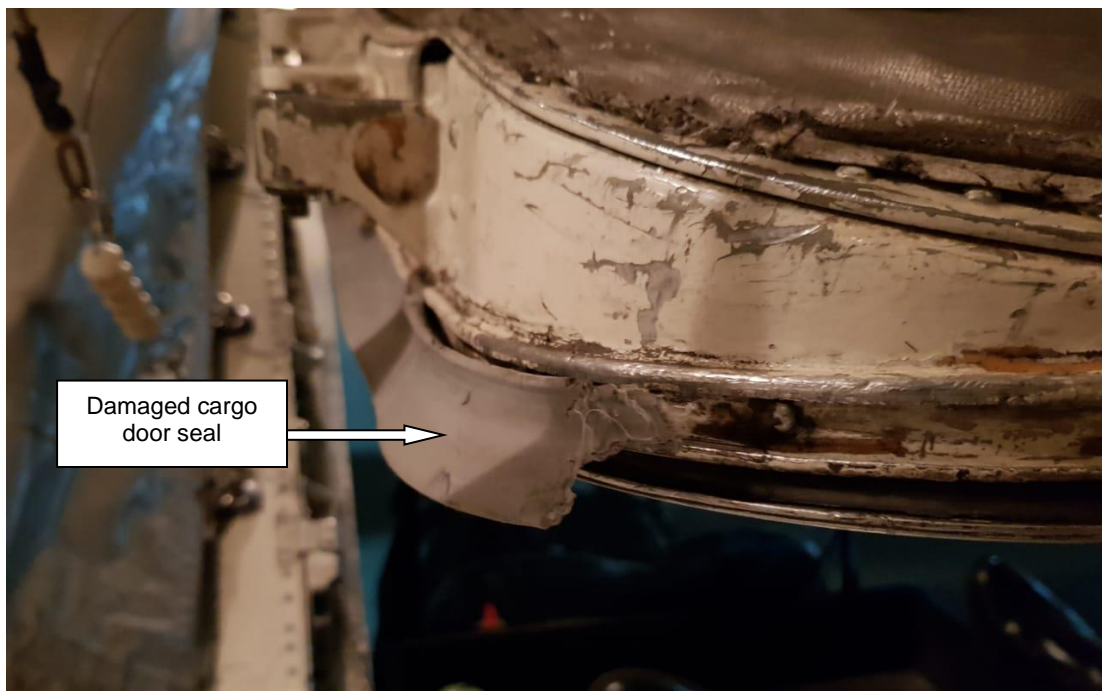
A section of the aft cargo door pressure seal (with the door in the open position).
